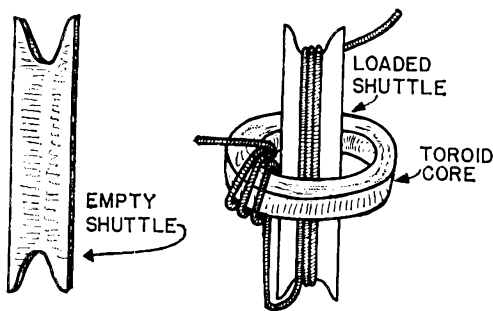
Details of a hand-winding system suitable for toroid inductors of medium or large dimensions. At A, a home-made winding shuttle fashioned from a piece of stiff cardboard or fiber insulating board. The sketch at B shows how the wire is wound on the shuttle (see text) and passed through the toroid core, again and again, until the winding is in place. The turns should be evenly spaced around the circumference of the form, maintaining uniform spacing between turns. Multi-layer inductors can have their turns close-wound and over one another.
